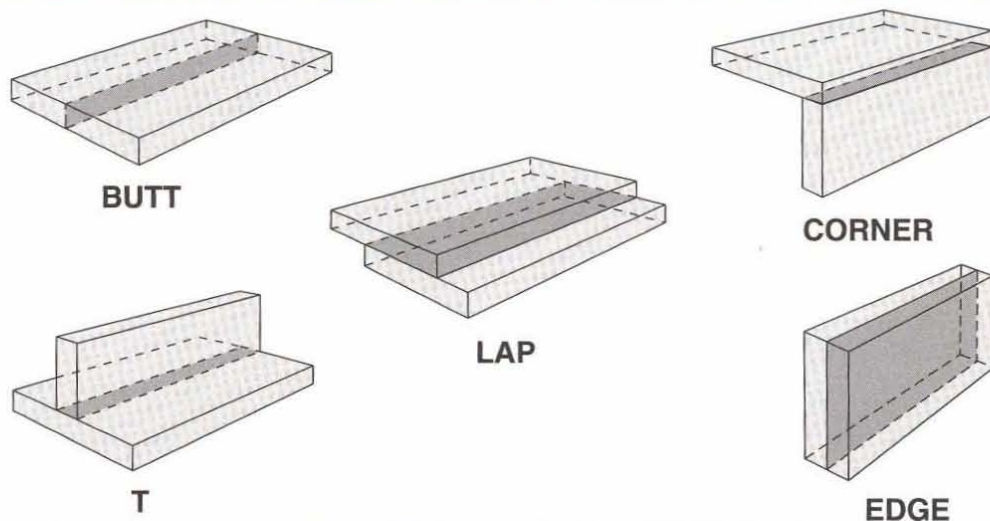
Welders should be familiar with how loads will impact welded joints and with the requirements for making the proper joint selection.
